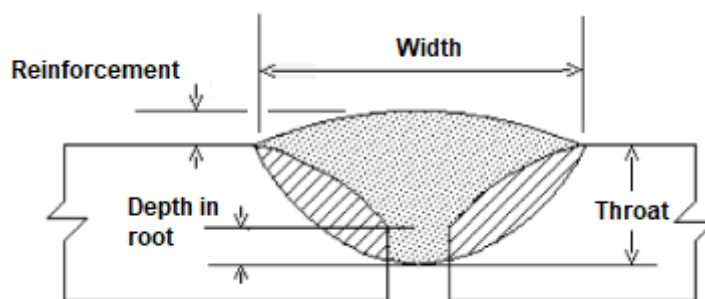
Geometric parameters of a single weld bead with V-groove.
